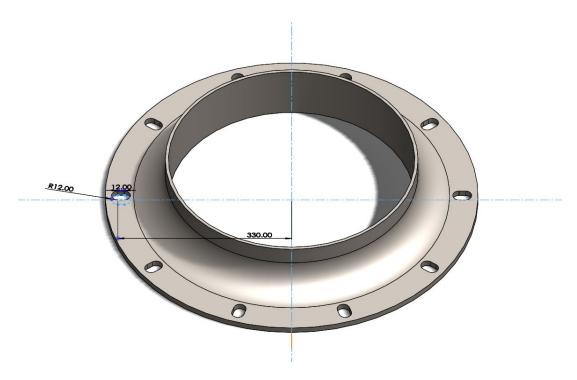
Isometric view of flange showing dimensions of slots for bolts in inches.
